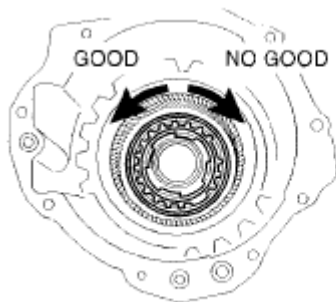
Inspecting Front Internal Gear And One-Way Clutch No.1
